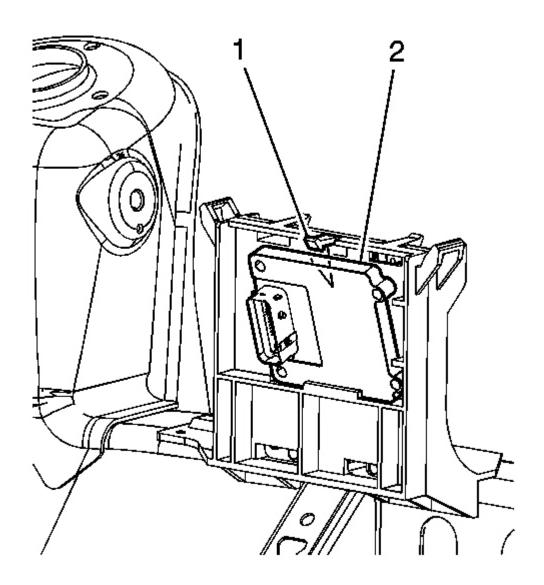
View Of ECM/TCM Retainer, Bracket & Retaining Tab Courtesy of GENERAL MOTORS CORP.
